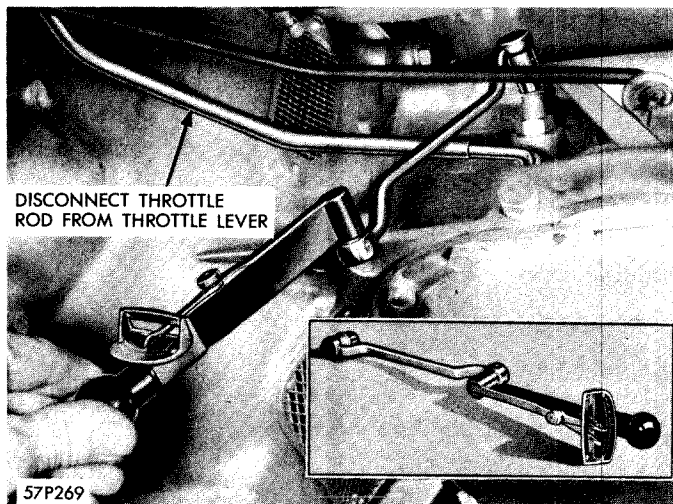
Adjusting Kickdown Band Using Wrench C-3380
